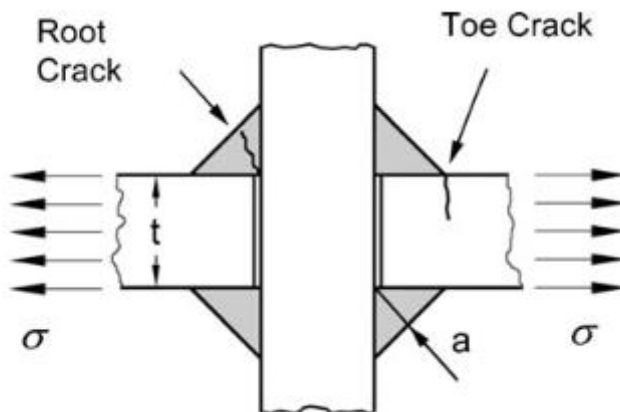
Example of failure locations in a welded cruciform joint (Fricke 2013, p. 754).
